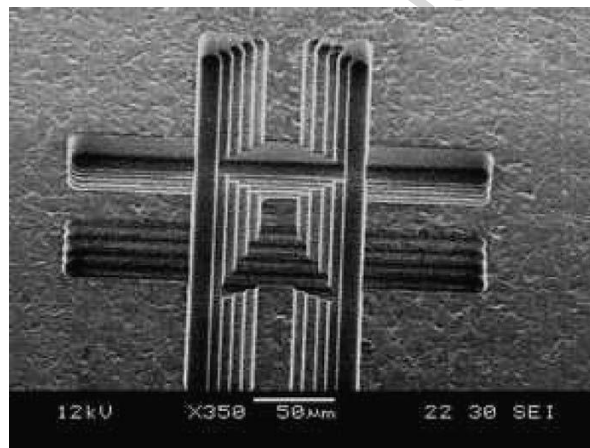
Micro-pyramid (25 μm ×25 μm ×35 μm at the top, step size 7 μm) machined on steel by micro-EDM milling with the on-machine block- μEDM fabricated electrode [11]
